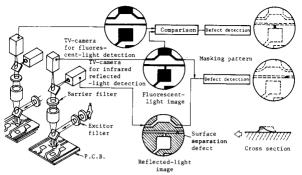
Scheme of defect detection method for the PCB pattern inspection system.
